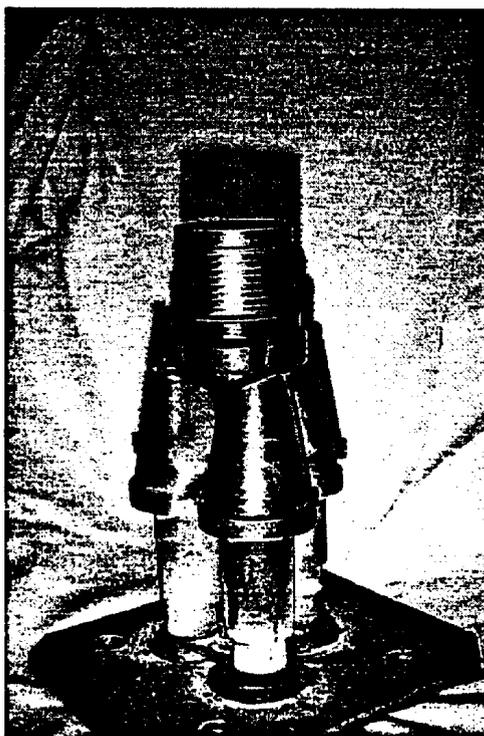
The photograph illustrating the three sharp, hardened 4140-tool steel shapes during drilling.
